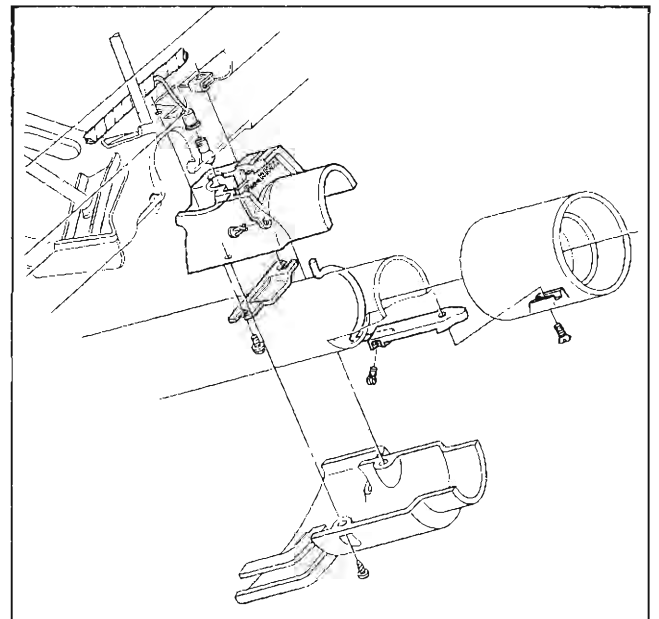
Dial Quadrant Assembly (Chevrolet)
